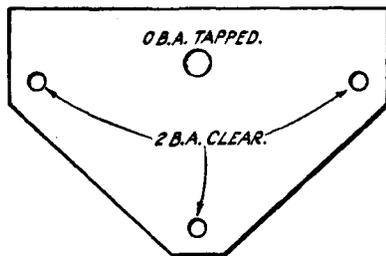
The bottom end plate should be constructed in a similar manner to the top end except as regards sizes of holes.
